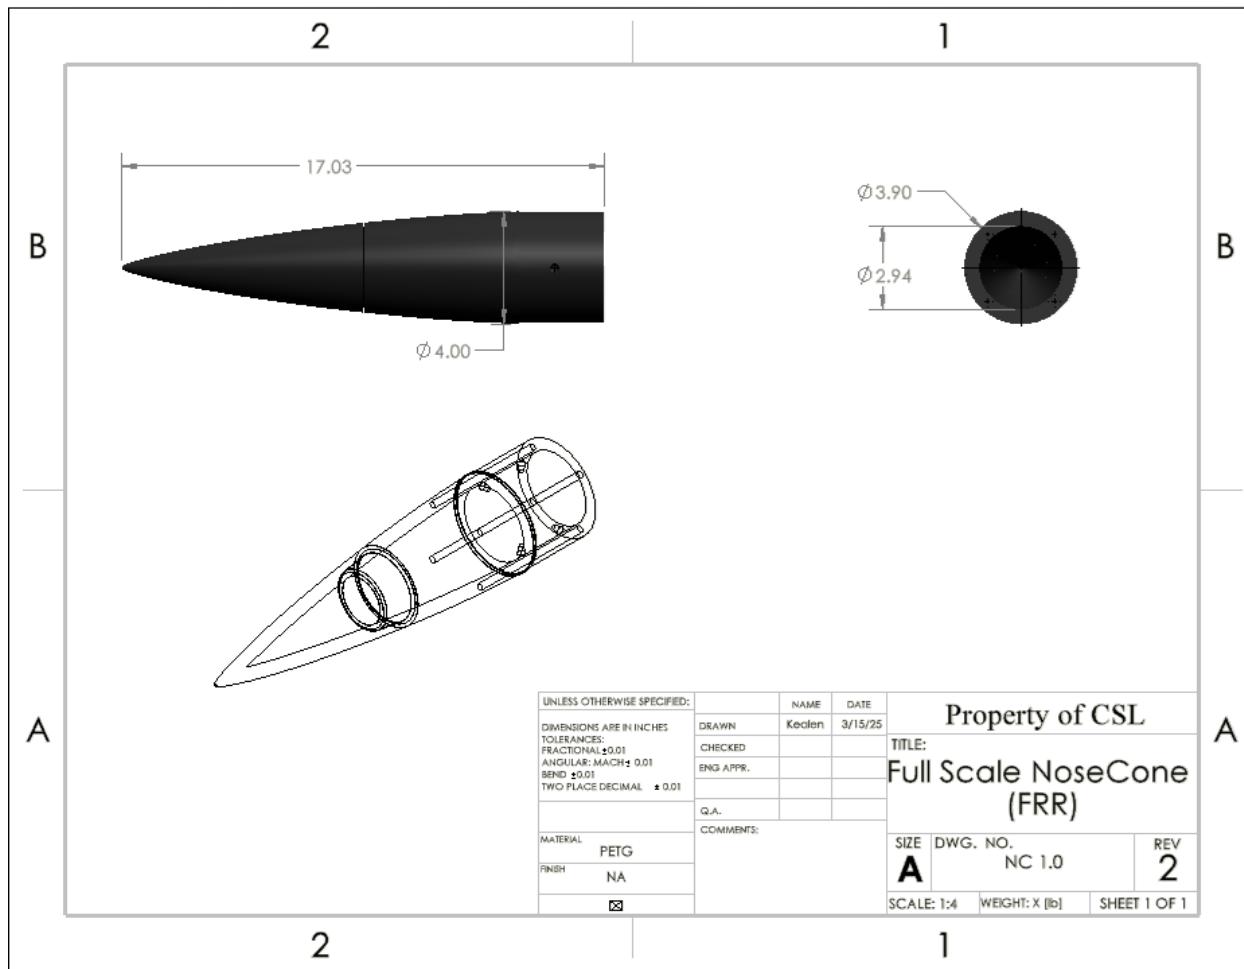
Dimensioned SolidWorks drawing of the nosecone.
